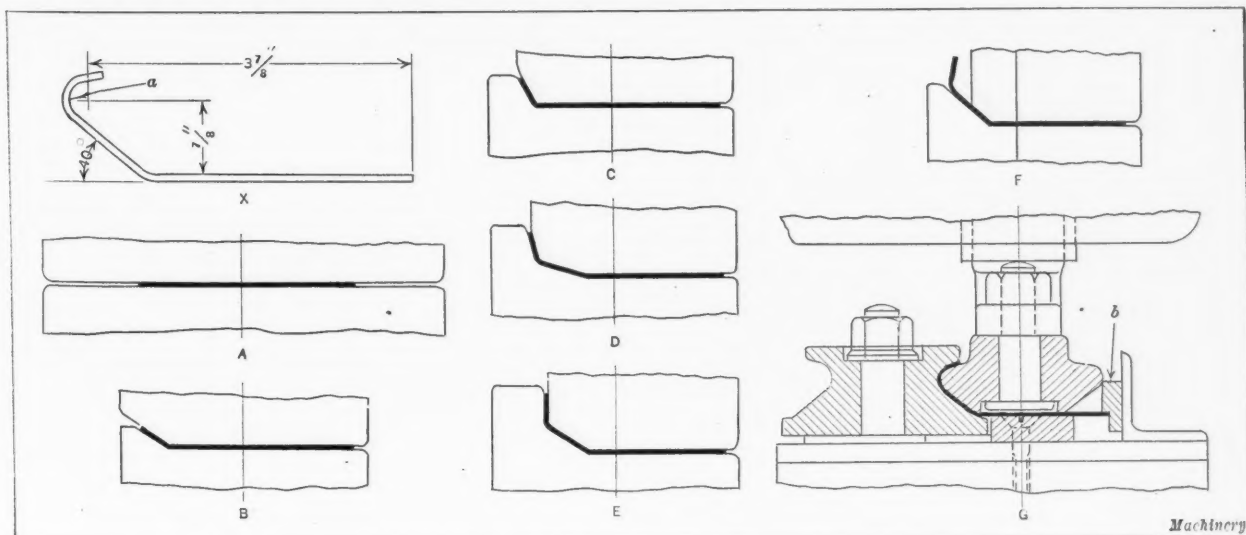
Sheet-metal Barn-door Track, and Rolls used in forming it
